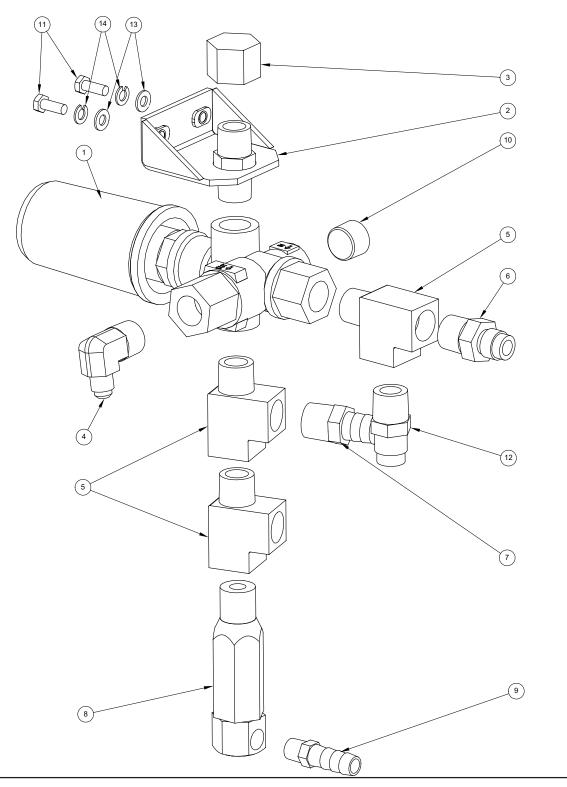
CDS 4.6/4.8 Hi-PSI Manifold Assembly D-6091 Rev B
